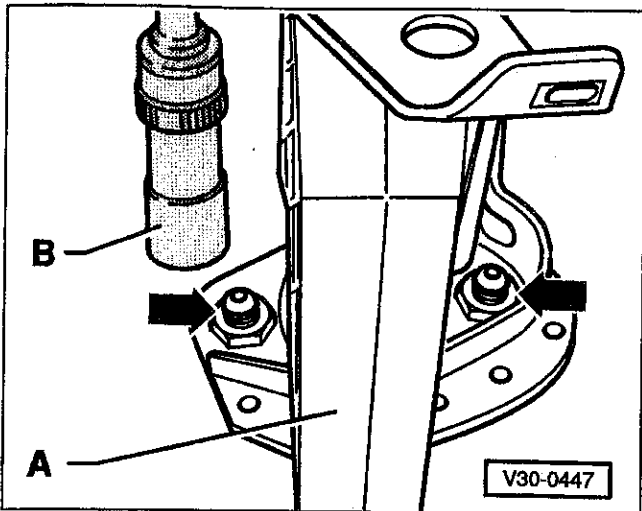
Master cylinder mounting nuts (arrows). Use a 13 mm deep-well socket (B) to remove nuts. Clutch pedal shown at (A).
